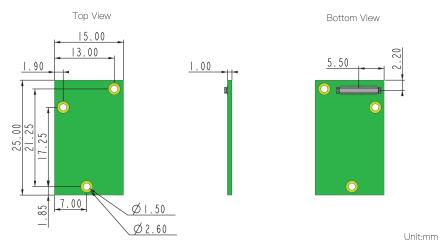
RAK18000 PDM Stereo Microphone Module Mechanical Drawing
